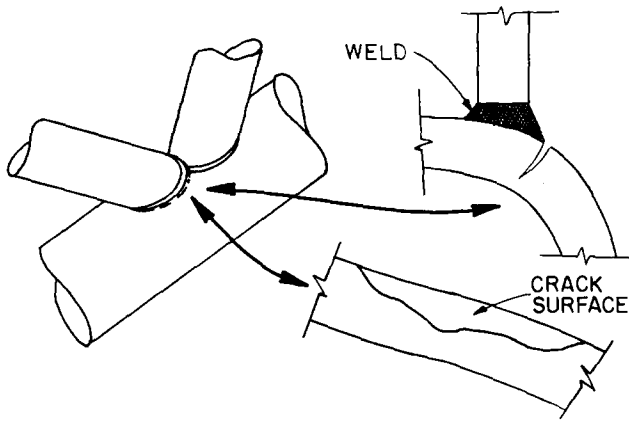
Tubular joint weld-toe surface flaw.
